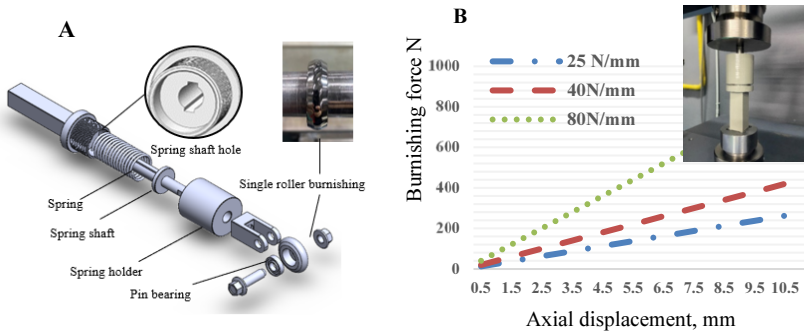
The 3D exploded view of a single roller burnishing tool (A) and spring compression test (B)
